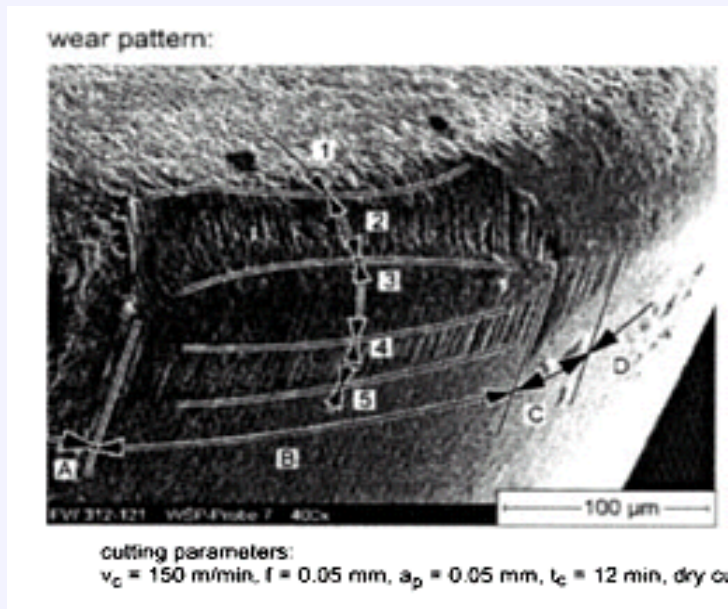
Wear pattern of a PCBN tool in hardened steel machining
